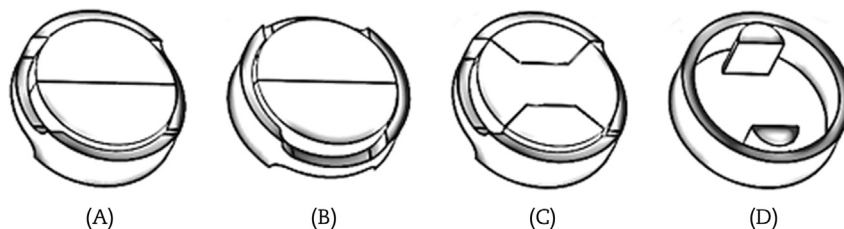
Four different methods of tangential tensile testing. (A) Side machined ring (B), top-bottom machined ring, (C) side-machined ring with dogbone, (D) small mandrels.
